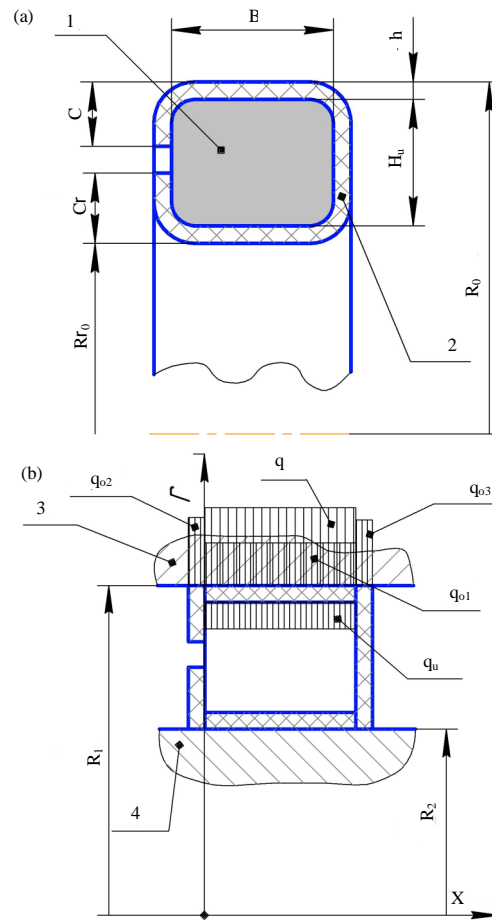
Sealing scheme: a) o-ring prior to assembly and b) calculation scheme; 1: elastic element; 2: shell; 3: cylinder; 4: rod
